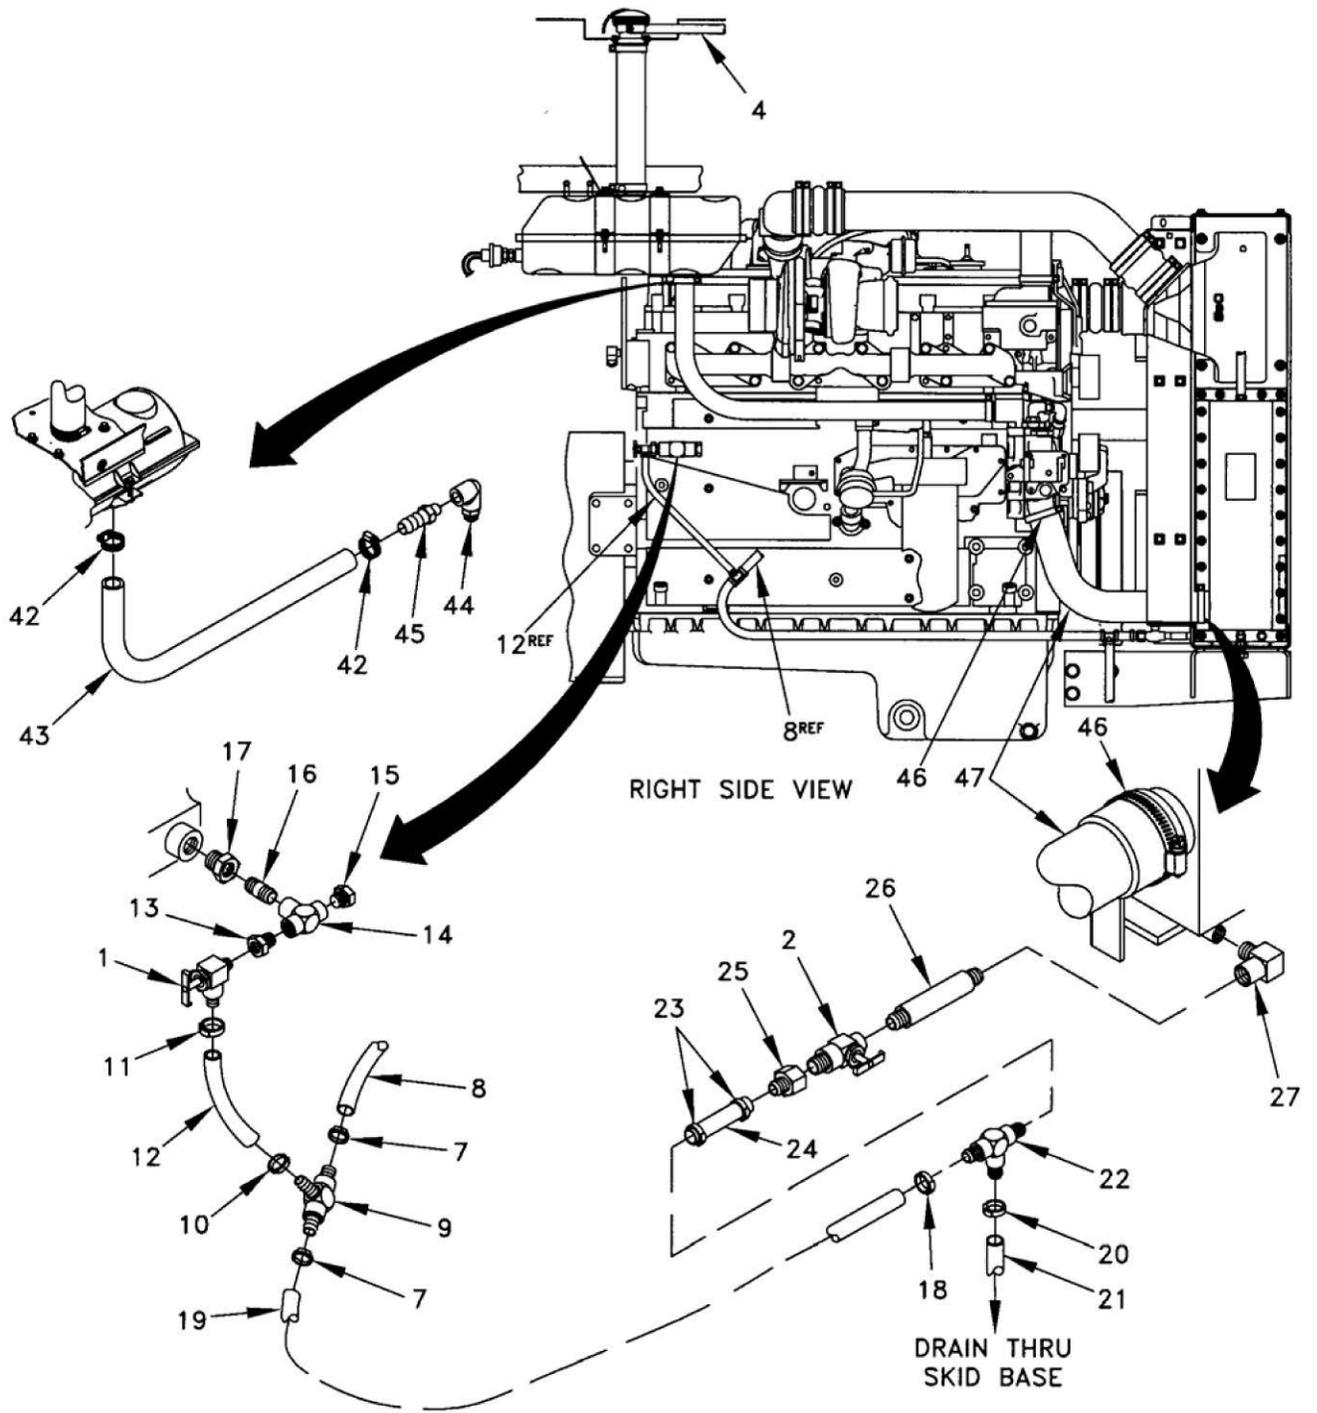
Coolant Hose Assemblies (Sheet 1 of 2).
